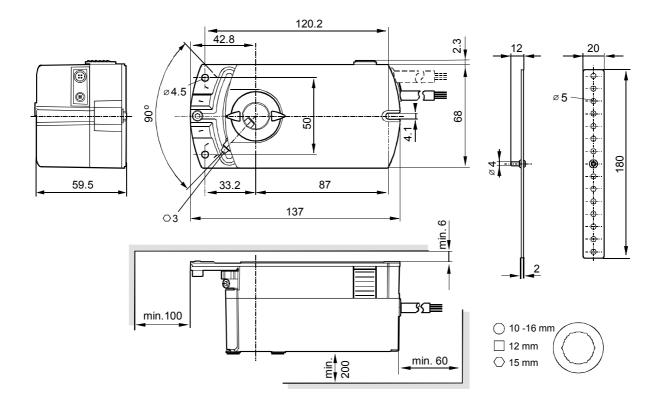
Dimensions ML6174E3/6674E3/7174E3 in mm
